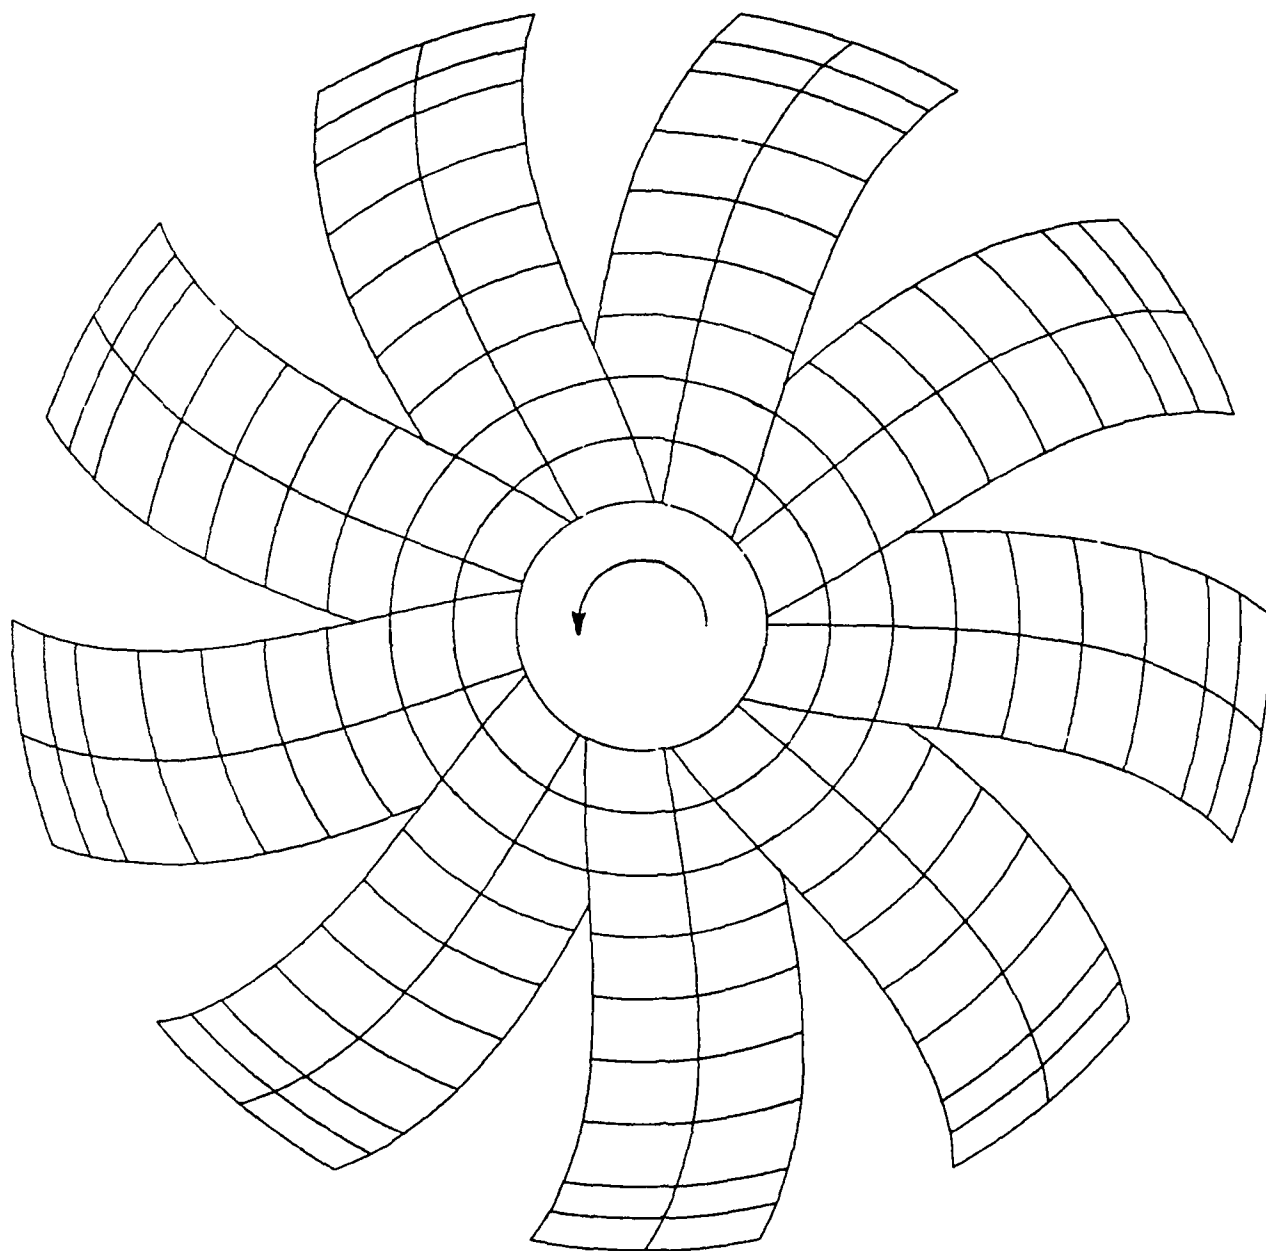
PROJECTED VIEW OF AFT PROPELLER
